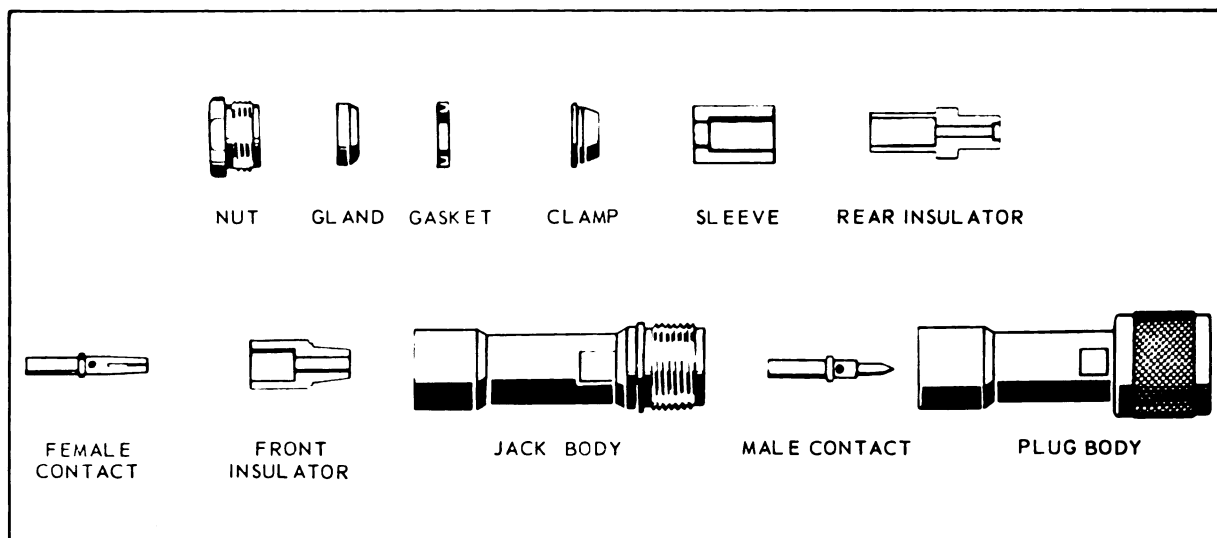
HN Connectors with Captivated Contacts - Exploded View
